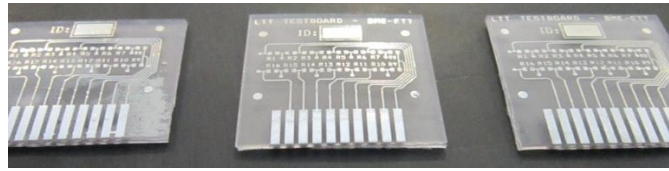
Biodegradable test boards (CA) prepared for soldering
